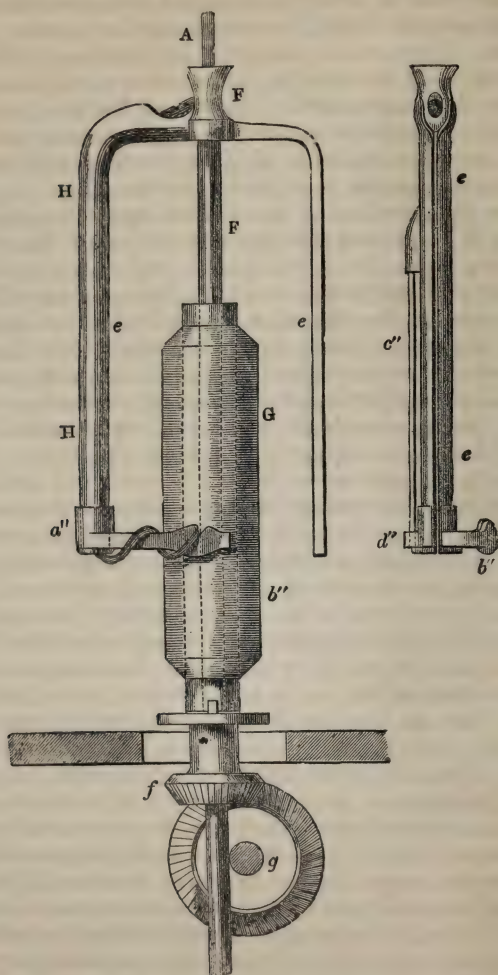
Spindle of Bobbin and-Fly Frame, with Spring Presser.
